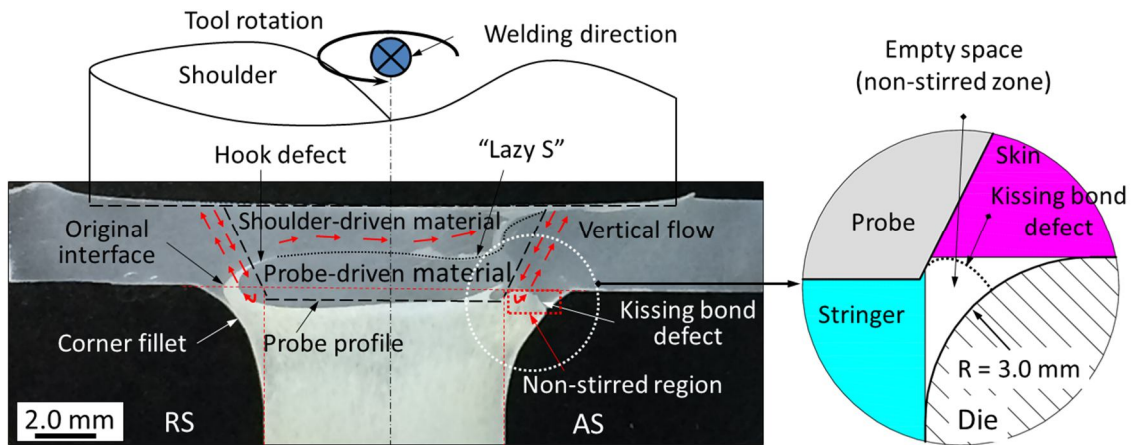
Illustration of formation of hook and kissing bond defects in T-lap joints at welding speed of 50 mm/min.
